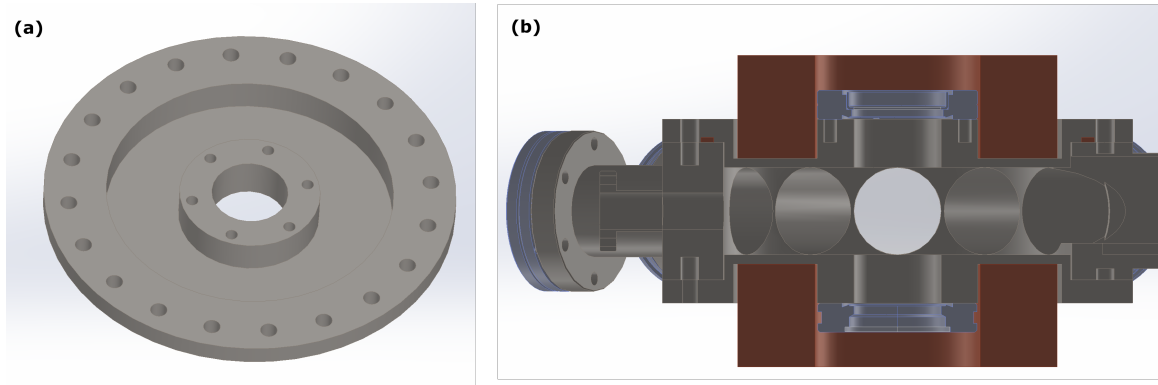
(a) Re-entrant flange which is to be placed on the top of the MOT chamber (b) The MOT chamber showing the design of the electromagnetic coils required for the 3D MOT field gradients.
